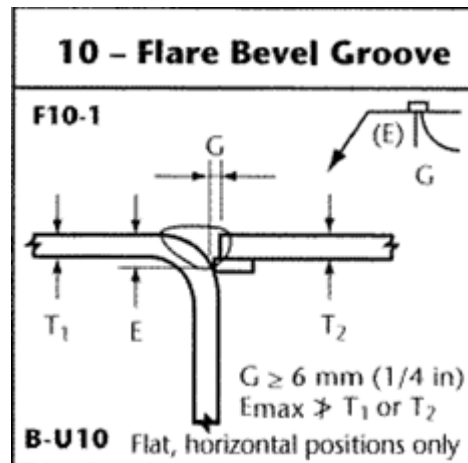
Flare bevel groove weld for CJP using FCAW-G (CSA W59 2008)
